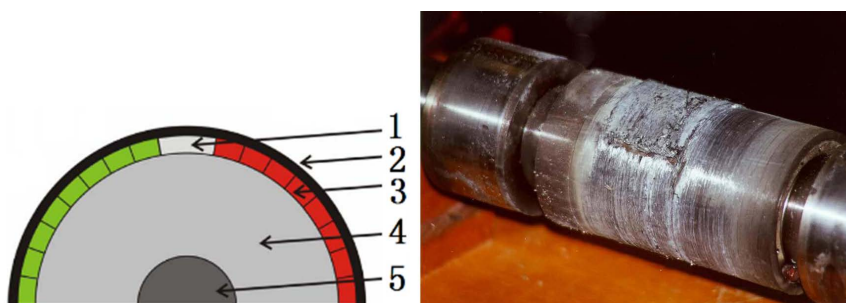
Rotor metal sleeve of surface-mounted permanent magnet motor [23]
